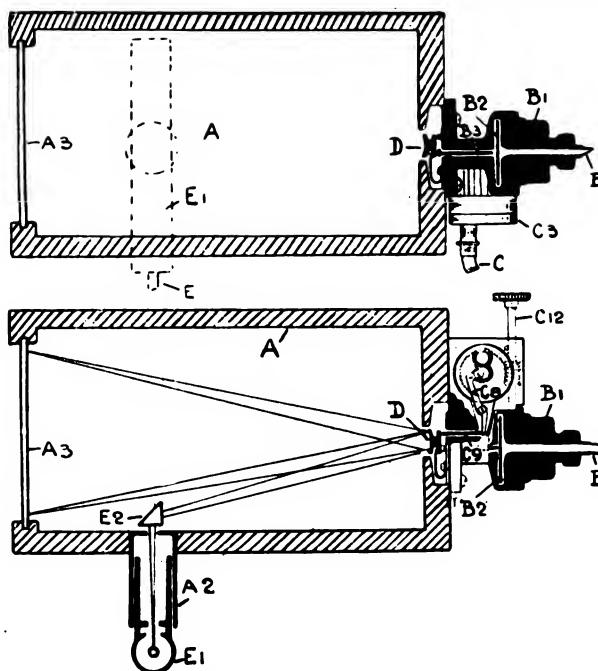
Diagrammatic sectional drawings showing the construction of the Manograph. The upper drawing is a vertical longitudinal section, and the lower is a corresponding horizontal section.
